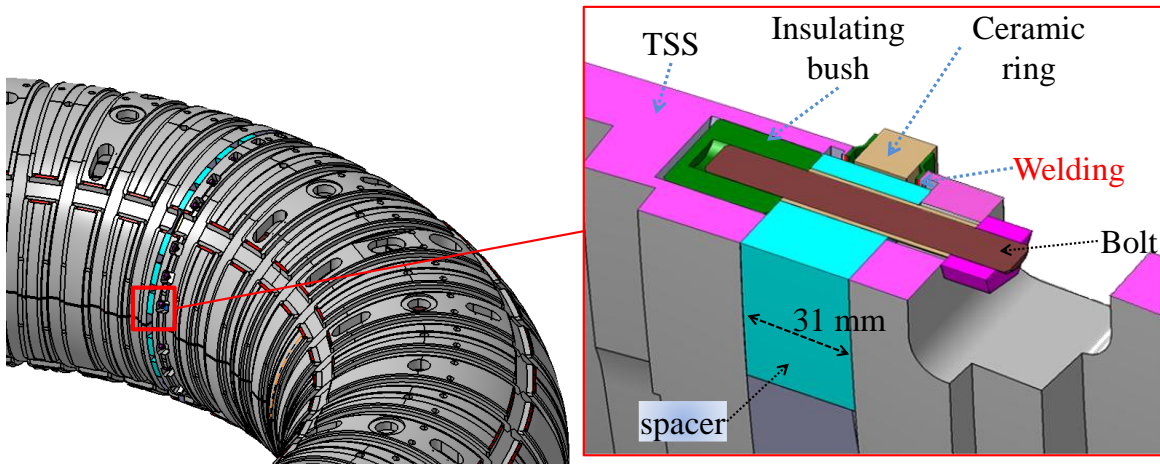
Isometric sectional view of bolted joint at poloidal cut
